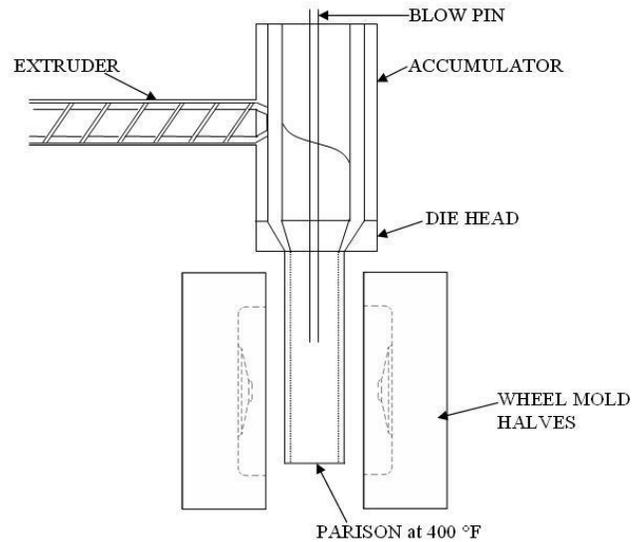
Schematic of Extrusion blow molding for a plastic wheel, showing the extruder, the parison and the two mold halves (Blow Molding, 2006; Alam et al., 2009)
